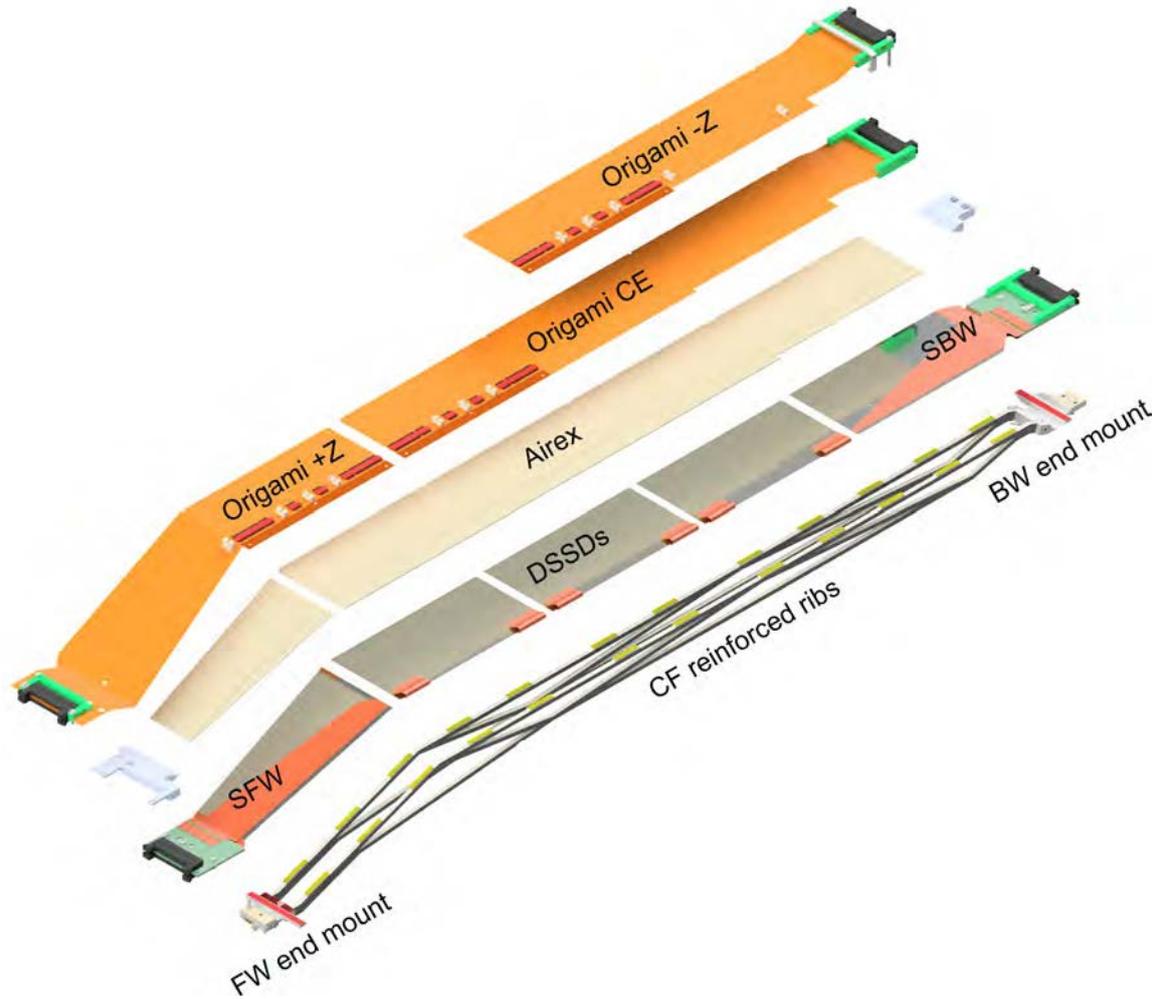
Exploded view of a layer 6 ladder. From bottom to top: rib sub-assembly, four rectangular and one trapezoidal DSSDs, pitch adapters (red), hybrid boards at both ends of the ladder, AIREX[®] foam, three versions of origami flexes.
